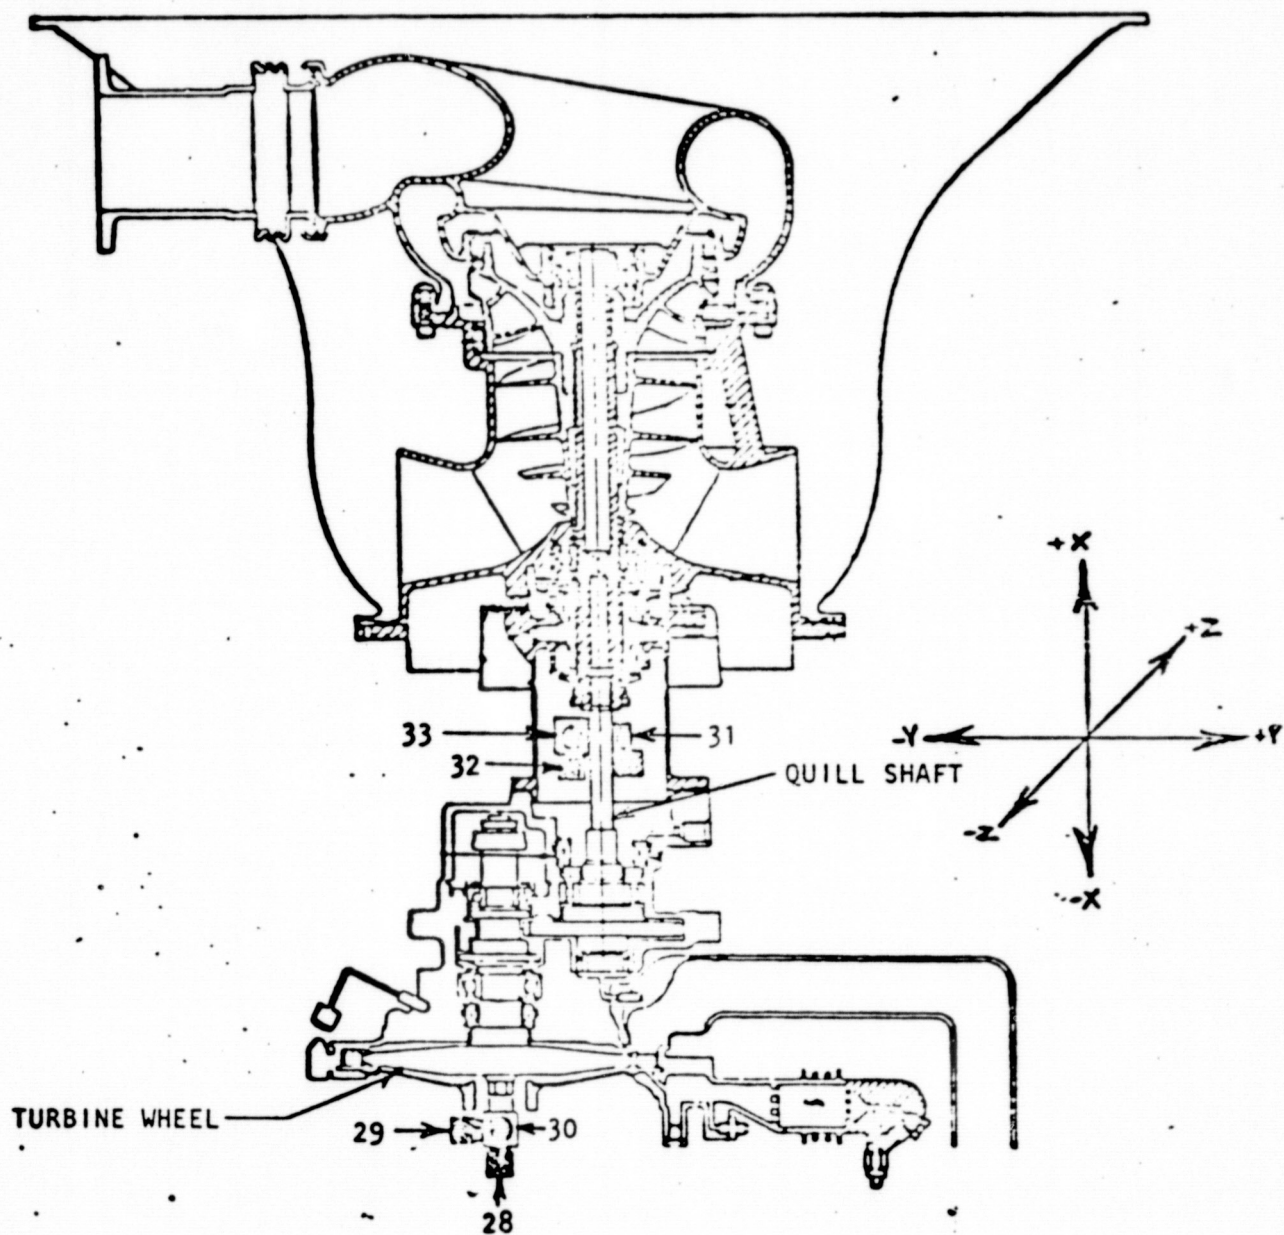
GENERAL VIEW SHOWING LOCATION OF THE TURBINE NUT AND QUILL SHAFT ACCELEROMETERS
